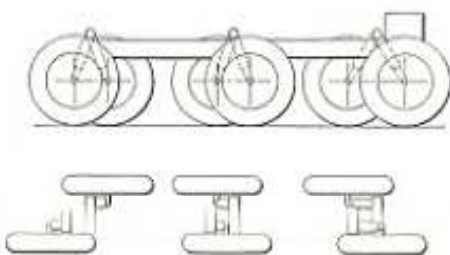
Diagrammatic arrangement of a six-wheeled walking machine.
